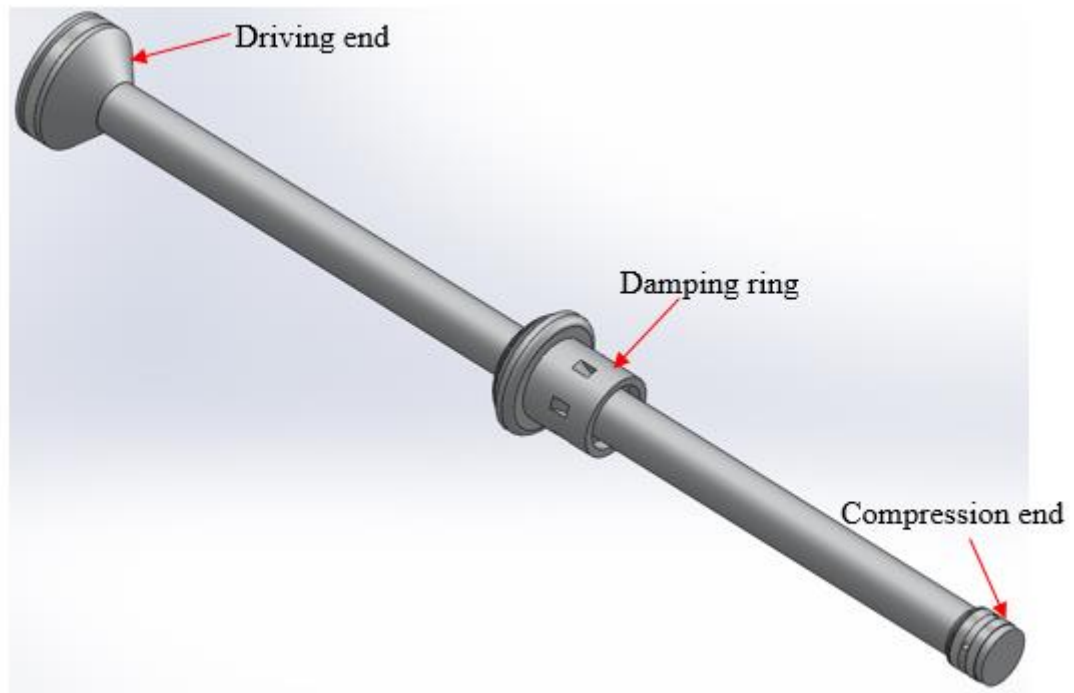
Piston rod assembly.2.2.6 Mixing Chamber.
